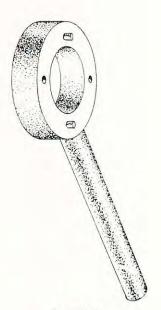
61–3694 Wheel bearing retainer peg spanner.
